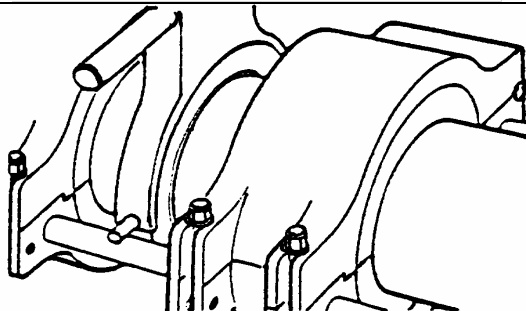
BUTT FUSION JOINTING - OPERATION
